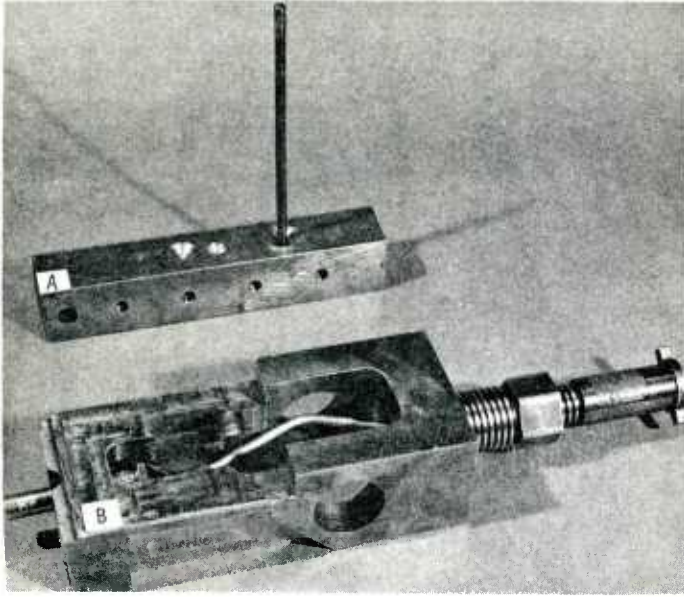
(A) A rod end-plate with a SCBAB rod in a vortex hole. (B) Impact fixture with a Revere 456 rod in a post-impact state.
